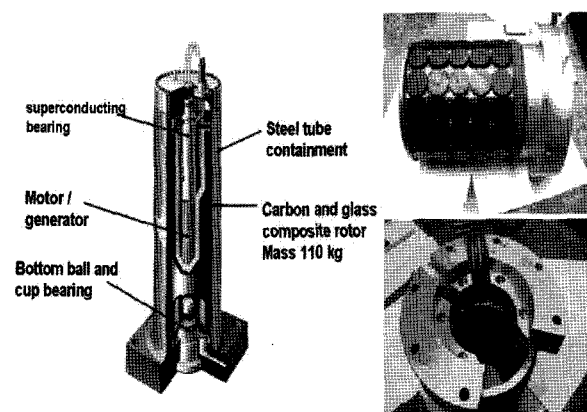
The configuration of the flywheel and the superconducting bearing.
